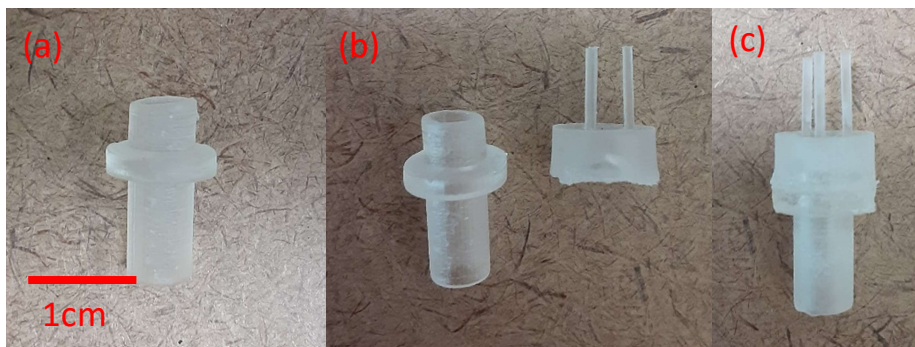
The hand-like device elements and assembling. (a) The 3D printed connector. (b) The 3D printed connector and the soft membrane. (c) The assembled hand-like device.
